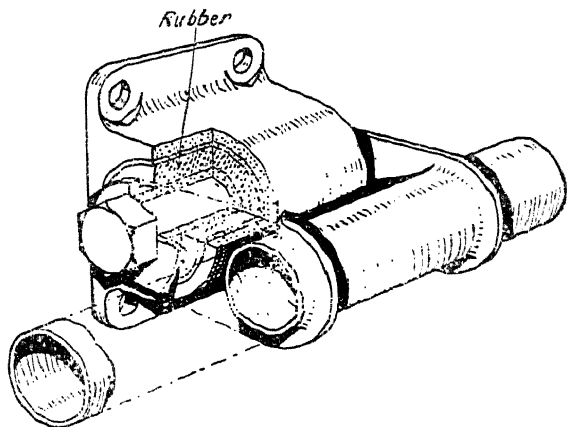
Silentbloc rubber-type flexible aircraft engine mounting.
